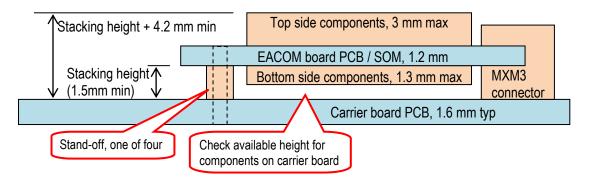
SOM Board Mounting in MXM3 Connector, Stacking Height
